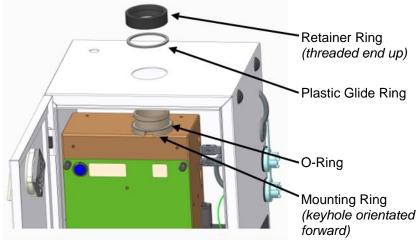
Install DustTrak Monitor – insert inlet ring up through opening
